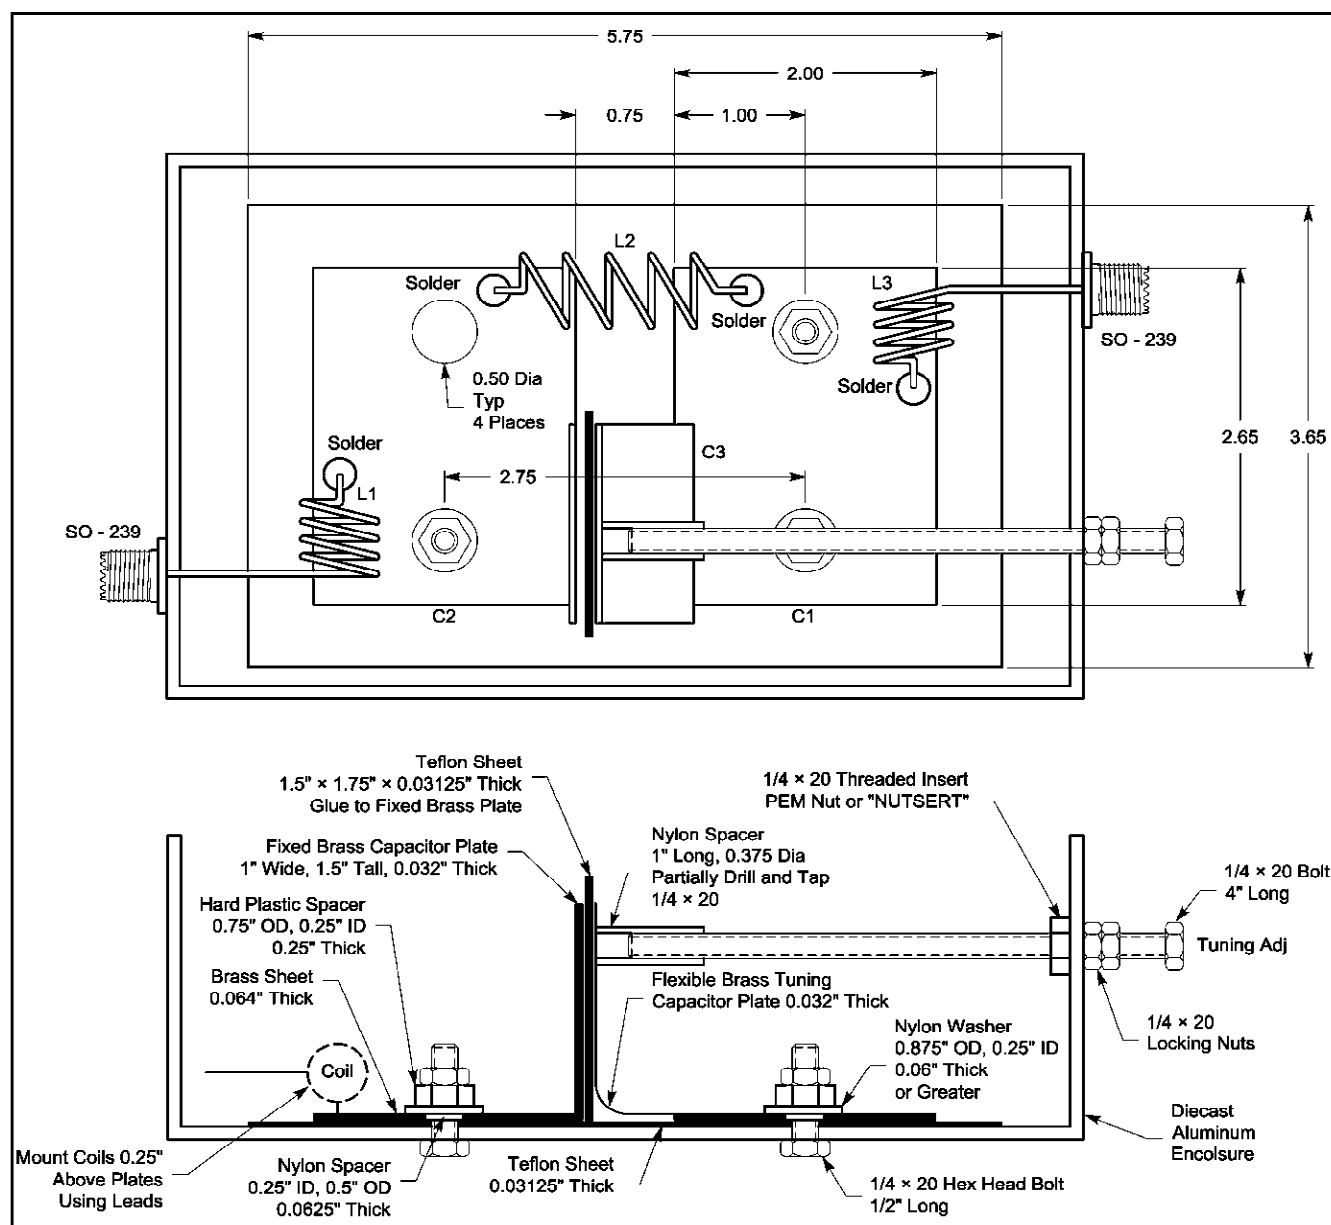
Assembly drawing for the low pass filter. All dimensions are in inches.
